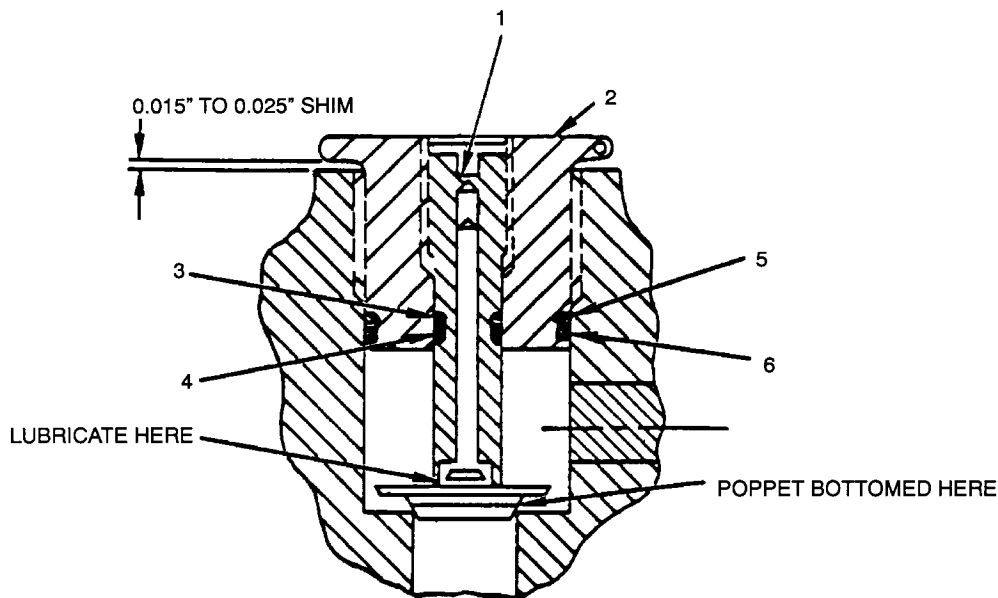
MIL-F-8815 Hydraulic Bypass - Type Filter Assembly
